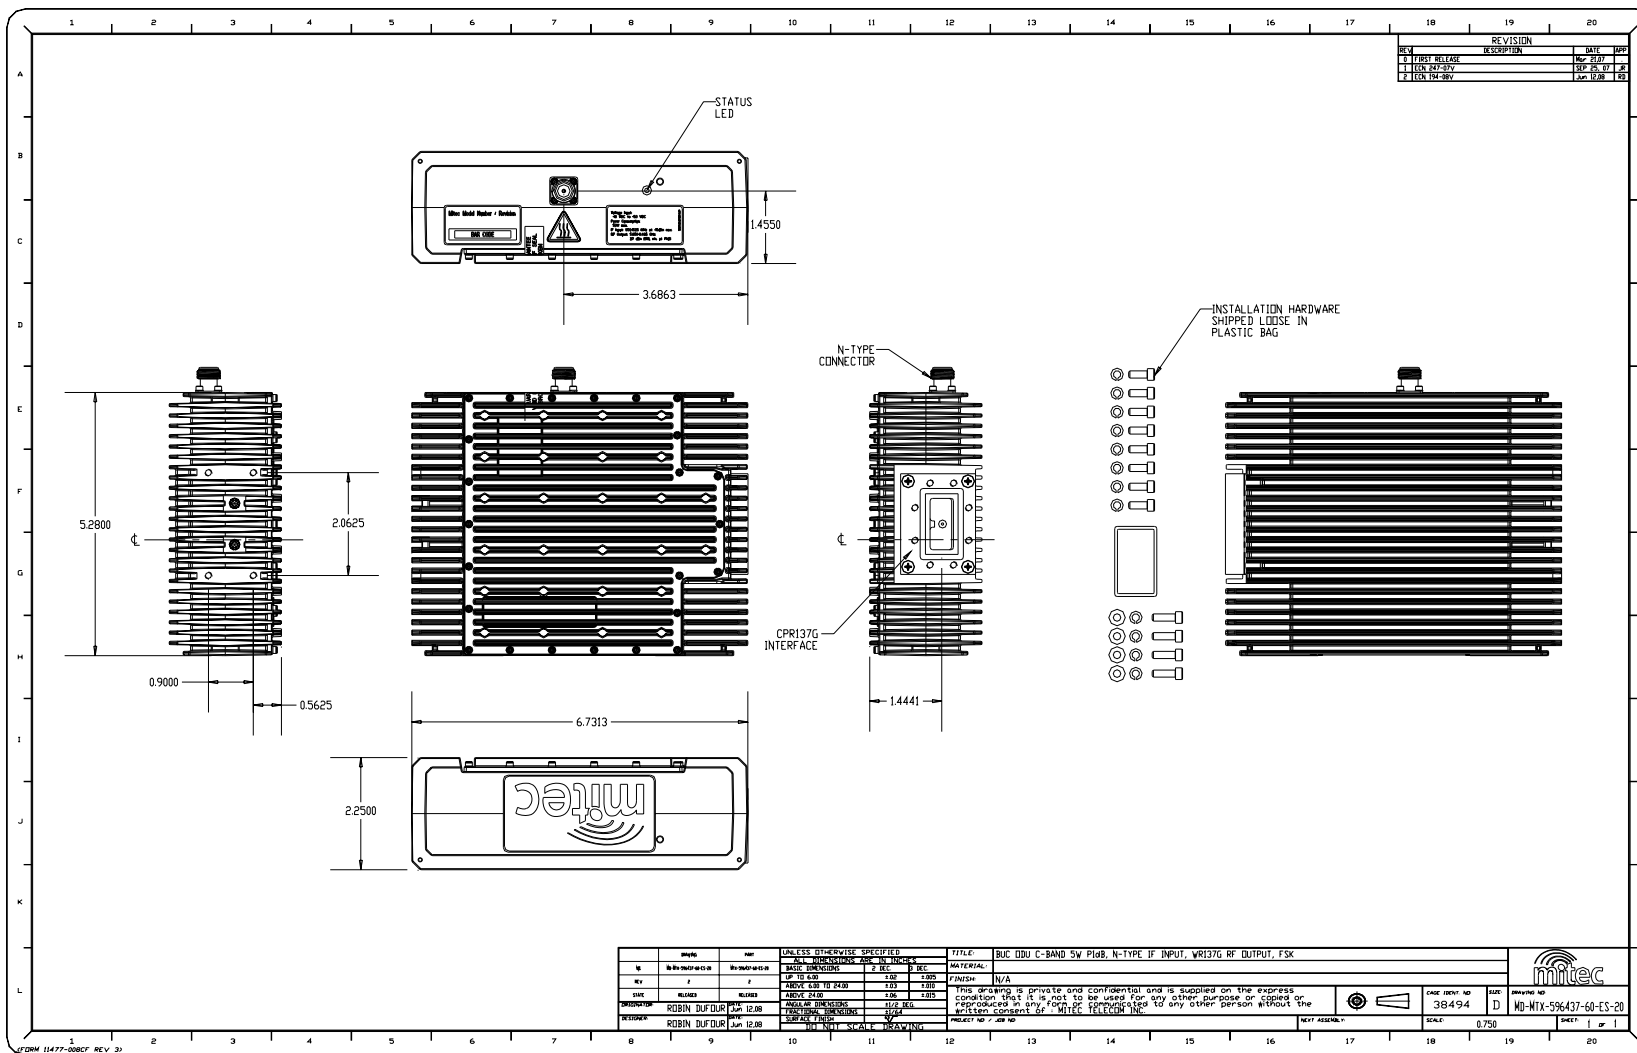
MTX-596x37-60-ES-20 - Outline drawing
